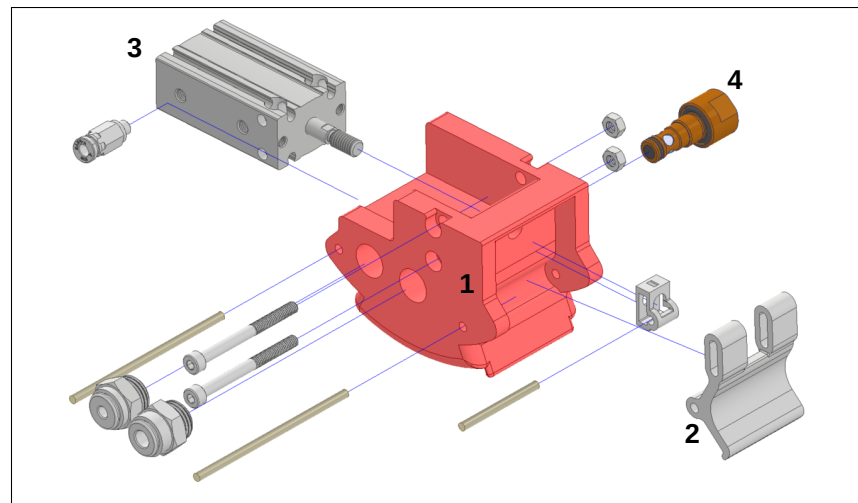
Exploded view of a gripper; the principal components are the base part (1), the clamp (2), the pneumatic cylinder (3), and the Venturi cartridge (4). Other components are screws, nuts, pneumatic fittings, and pins
